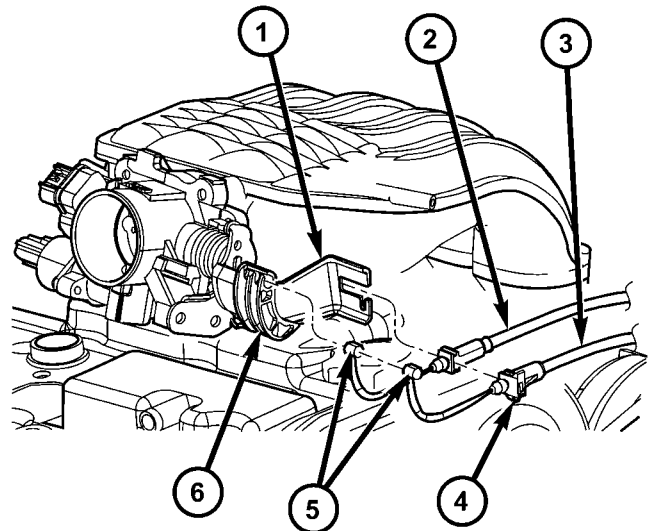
THROTTLE CABLE, PIN, RELEASE TAB-2.4L
